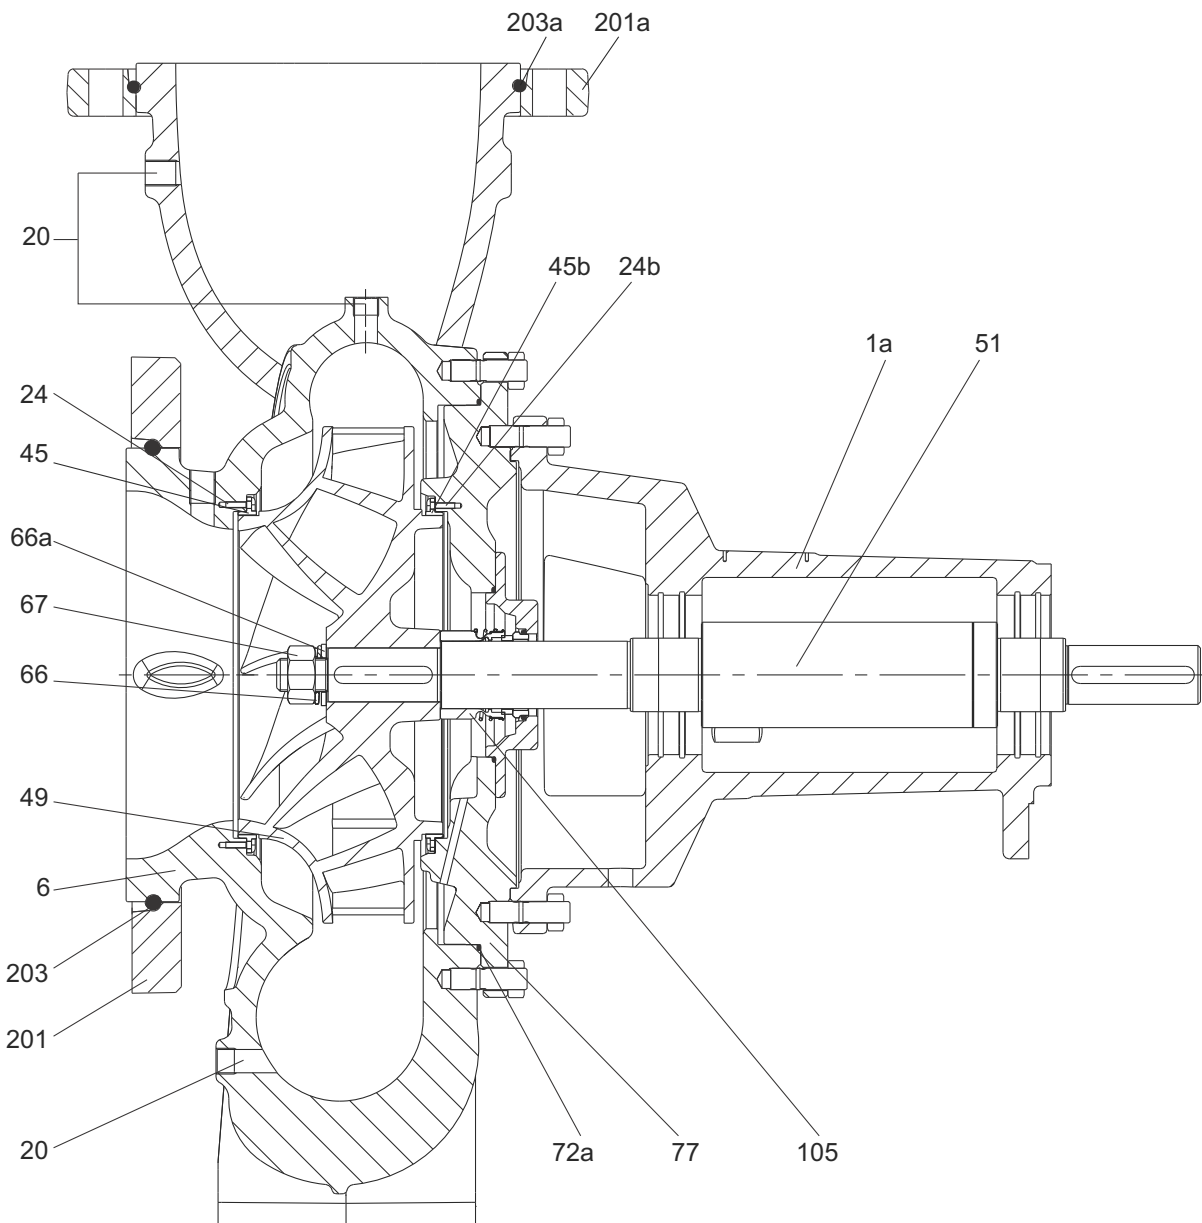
Sectional drawing, tangential outlet, DN 250 and DN 300
